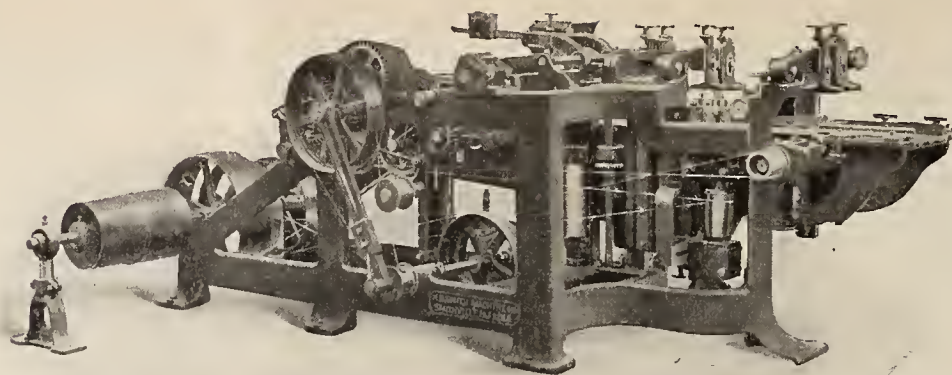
REAR VIEW OF EXTRA HEAVY 10-IN. MOULDER.
